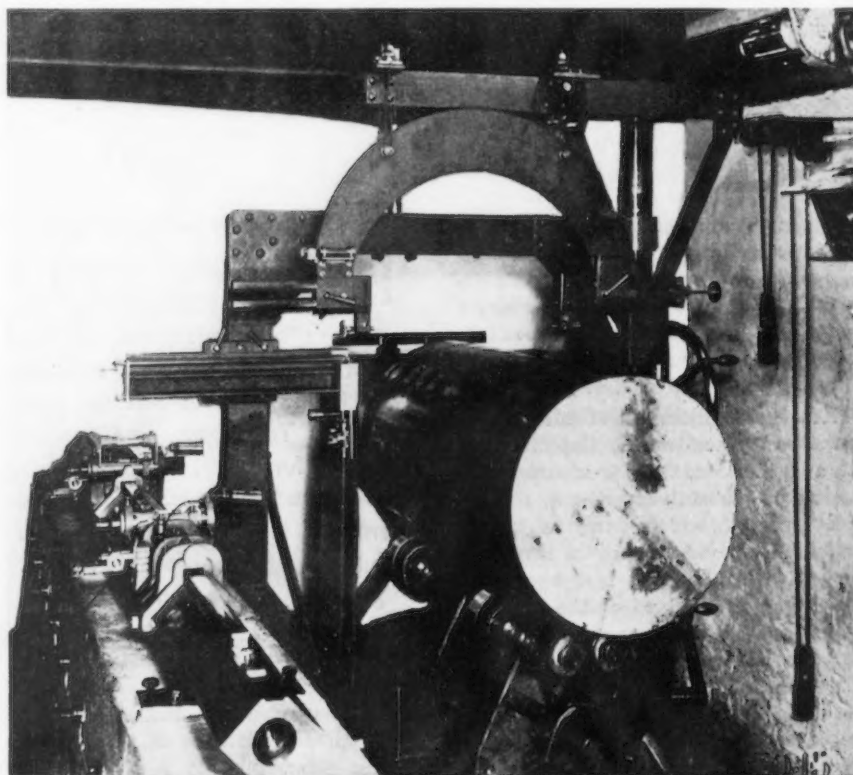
Horizontal comparator, caliper gage (raised) and scribing gear.
